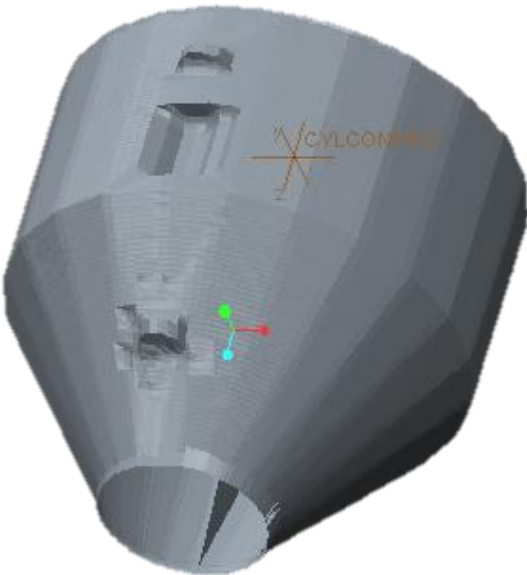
OBJ FILE FOR CYLINDRICAL-CONICAL PART WITH FEATURES
